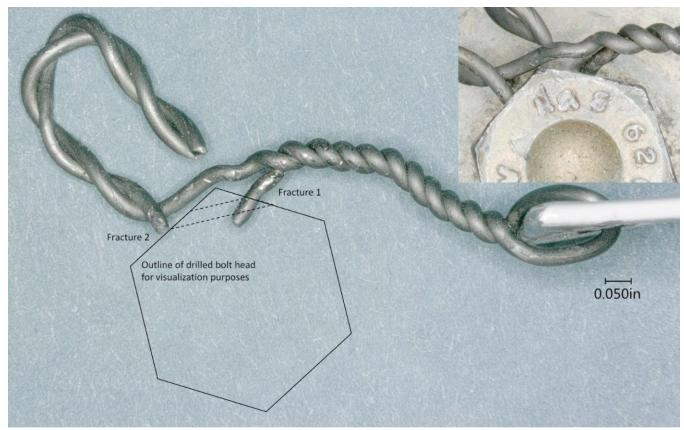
Right aileron inboard hinge attachment bolt safety wire with fracture position on bolt head depicted.
